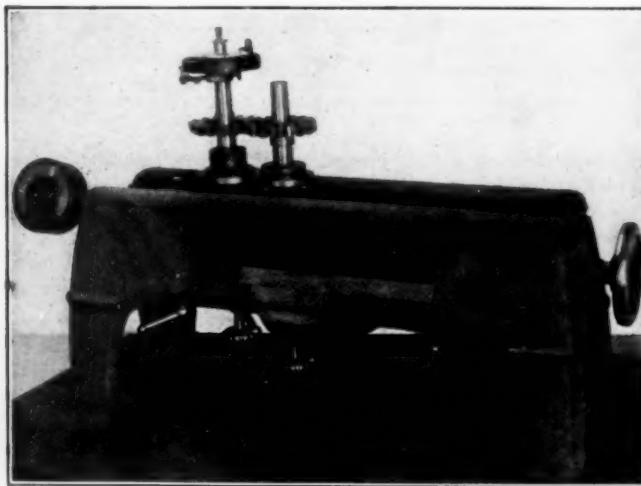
THE SAURER GEAR-TESTING MACHINE
